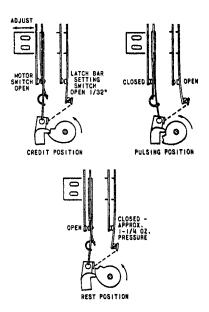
MOTOR & LATCH BAR SETTING SWITCHES.
